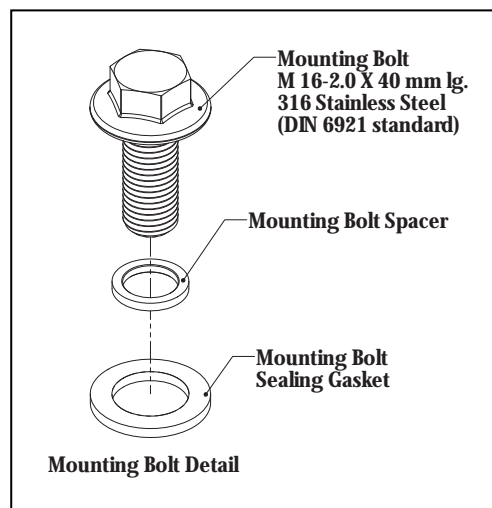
Robot Mounting Bolt, Spacer, and Gasket
